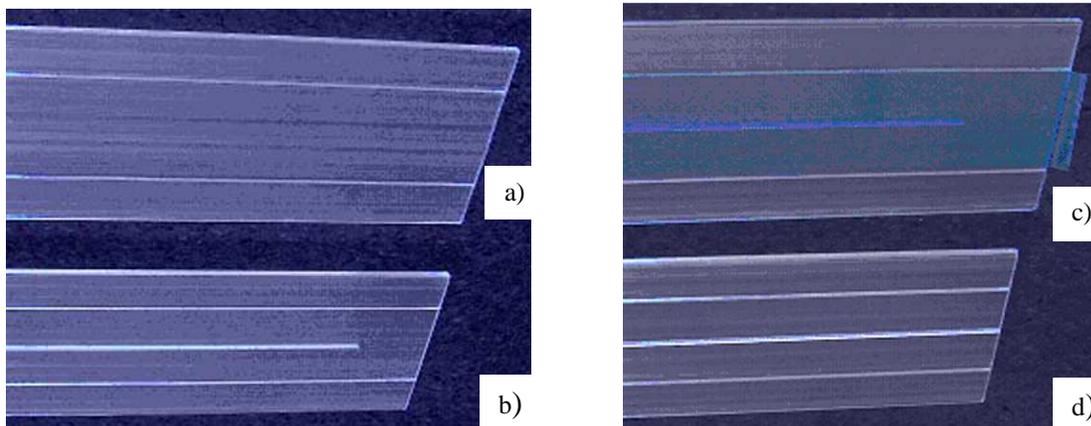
a) A strip after extrusion; b) The same strip with a machined separation groove; c) The strip with blue tape; d) The trimmed strip with the glued separation groove.
